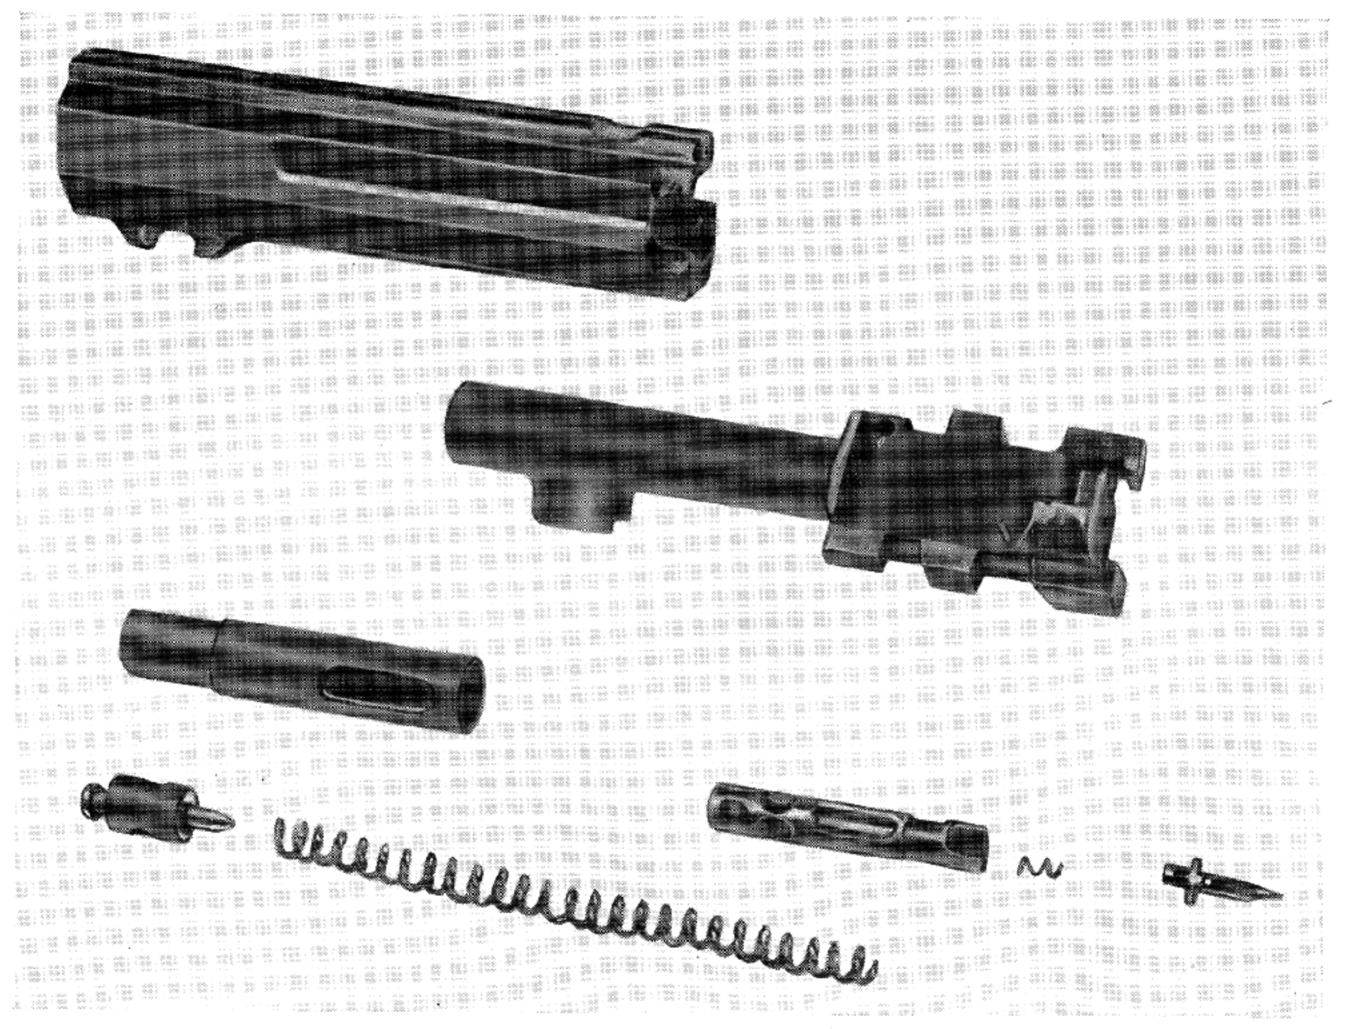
Synchronized version of 23-mm NS Gun. View of disassembled bolt.
